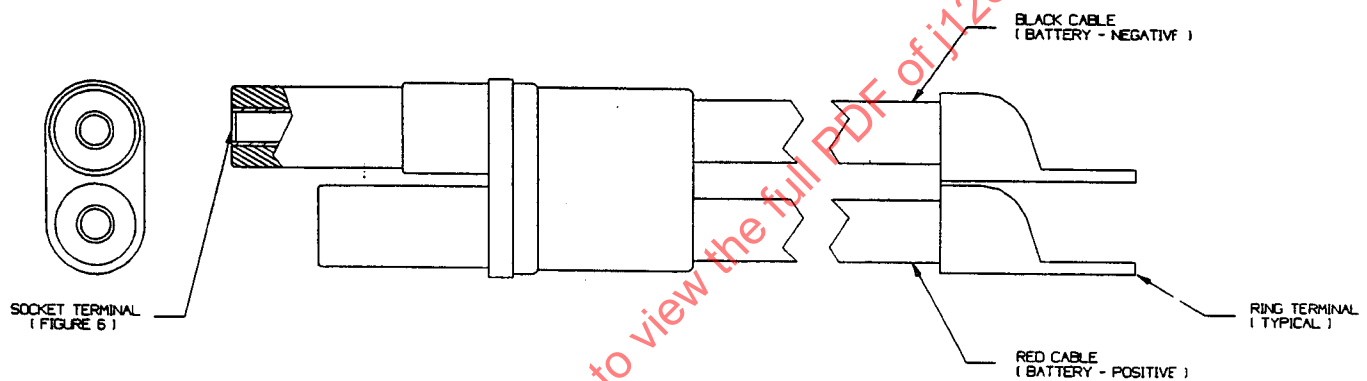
PLUG ASSEMBLY (MACHINE TO BATTERY CART)
